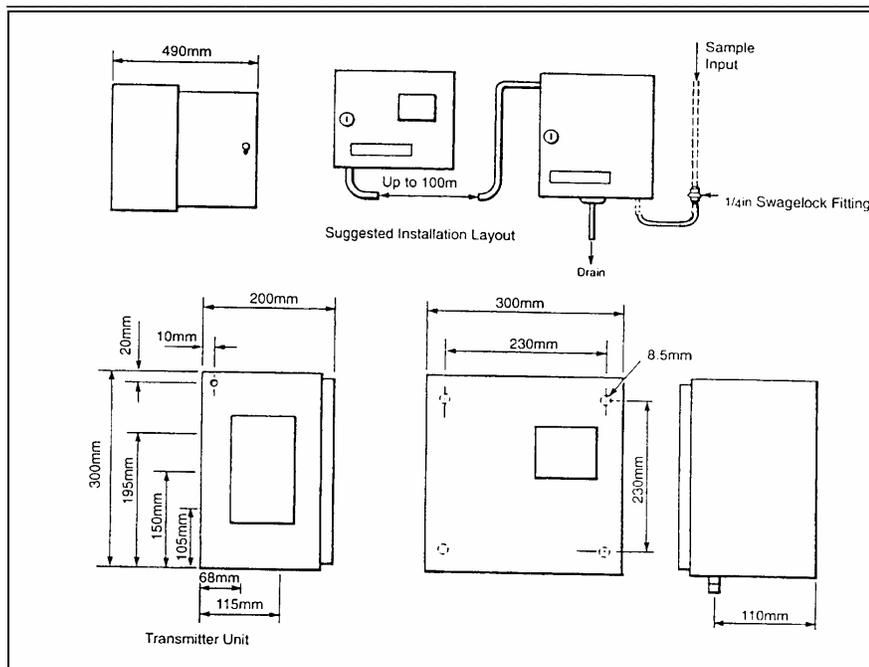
SENSOR UNIT DIMENSIONS AND INTERCONNECTION POSITIONS
